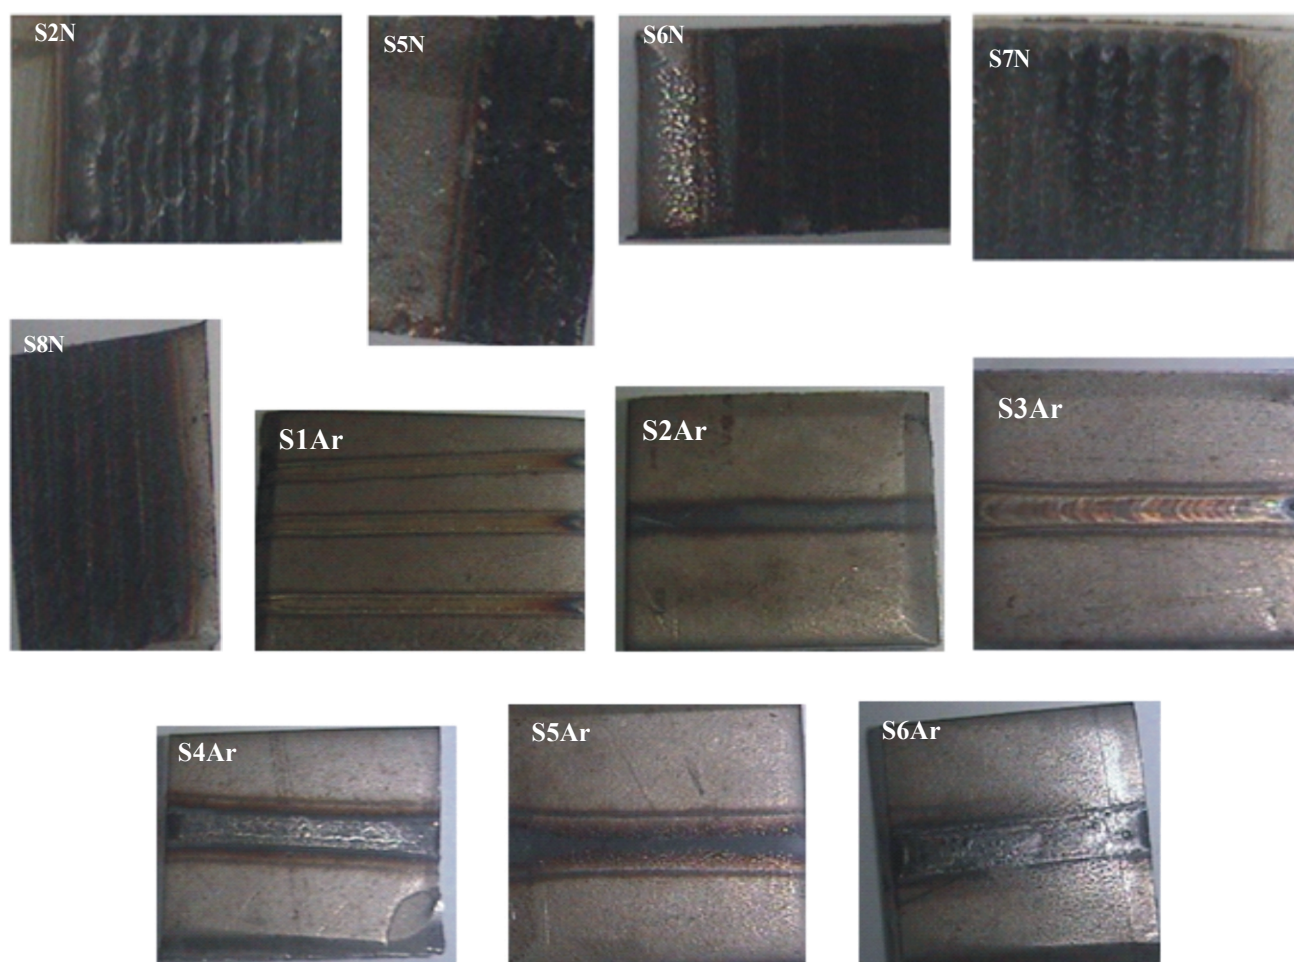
Optical photographs of laser treated 304 SS specimens.
